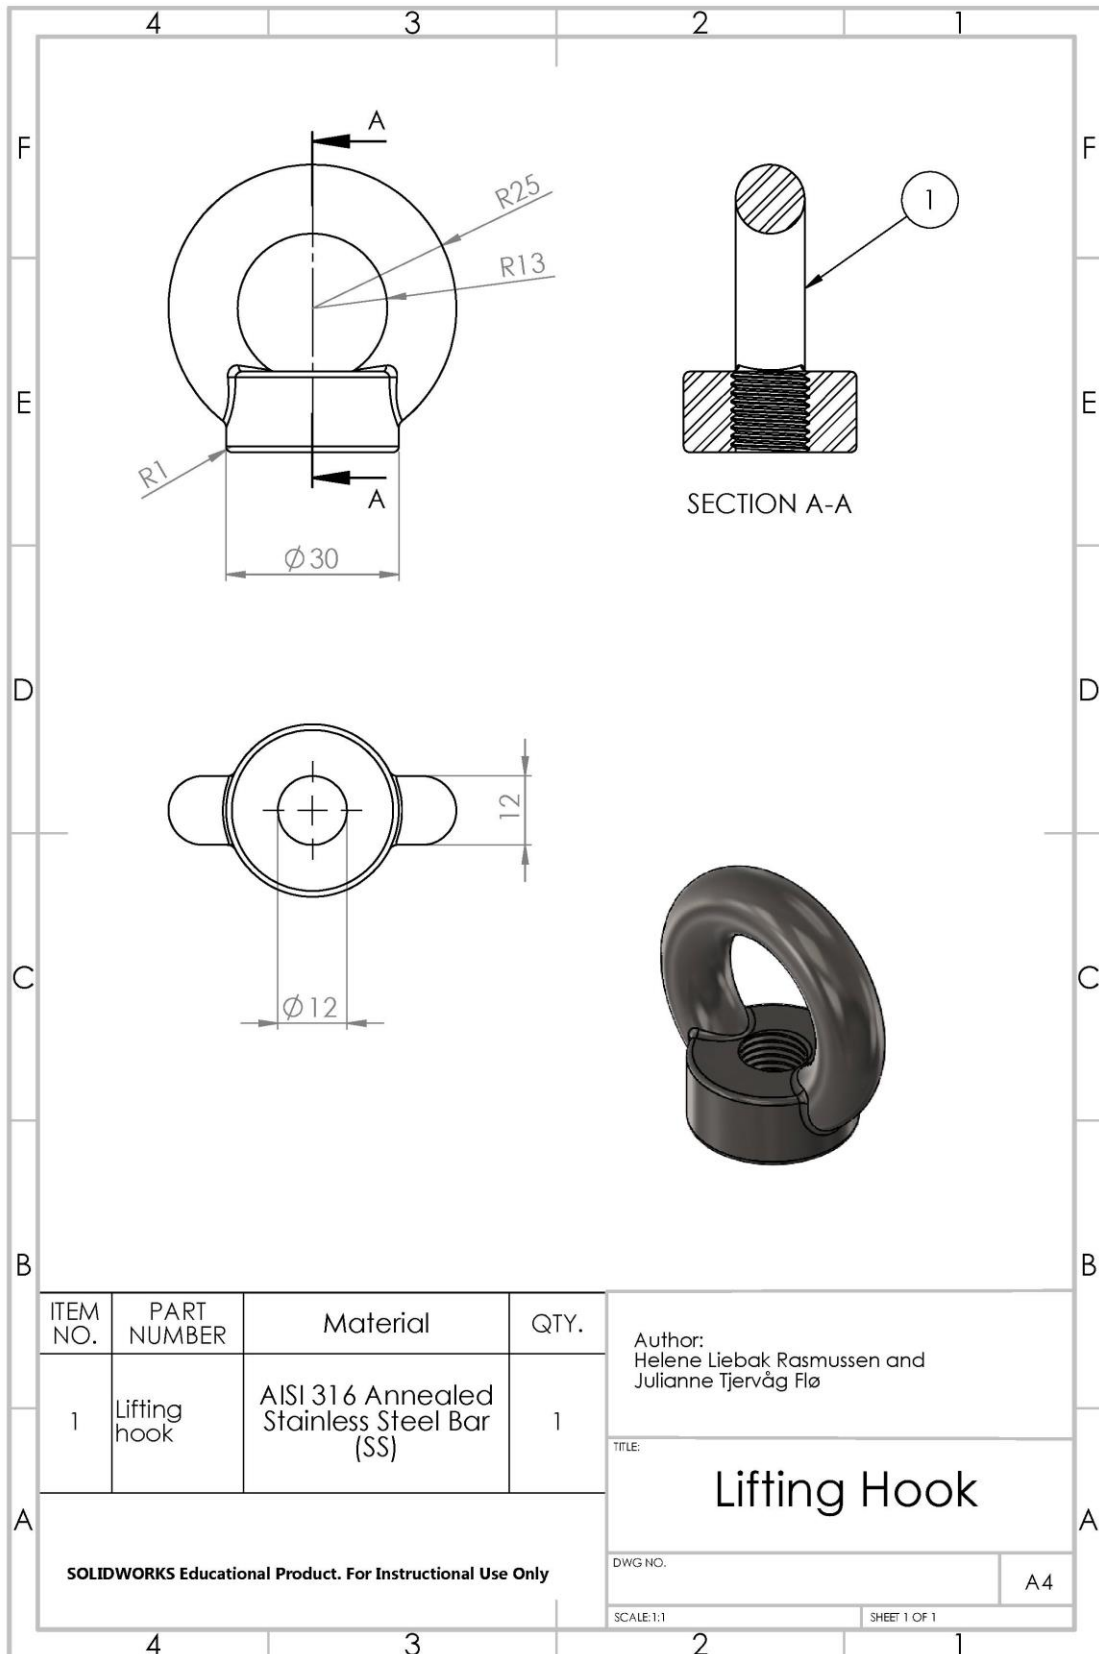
Technical drawing of the lifting hook. Created in SolidWorks.
